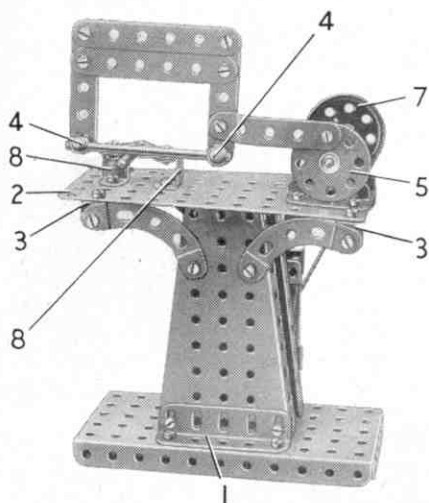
A model of a metal sawing machine fitted with a Magic Motor.
